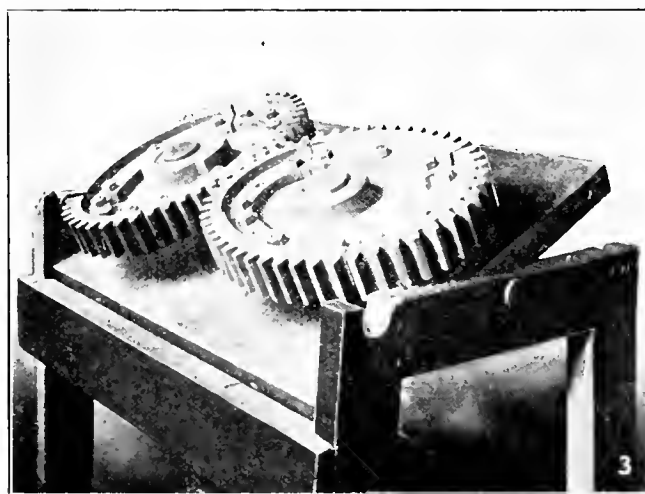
ASSEMBLING STAND FOR ELLIPTICAL GEARS
